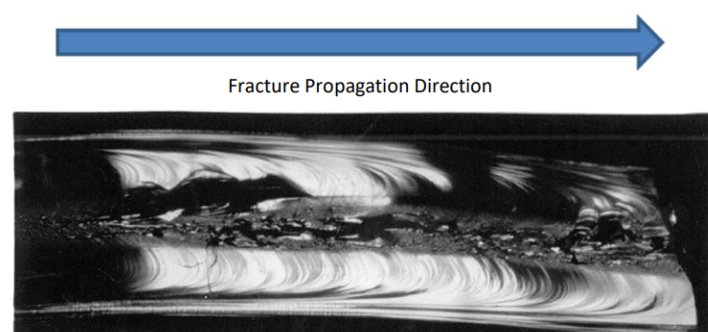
C. - Fracture Face of 7/32" Full Tempered Glass (Edge View)
